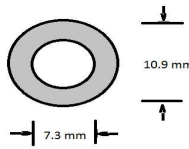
Cross-section of Fluid Carrying Pipe
